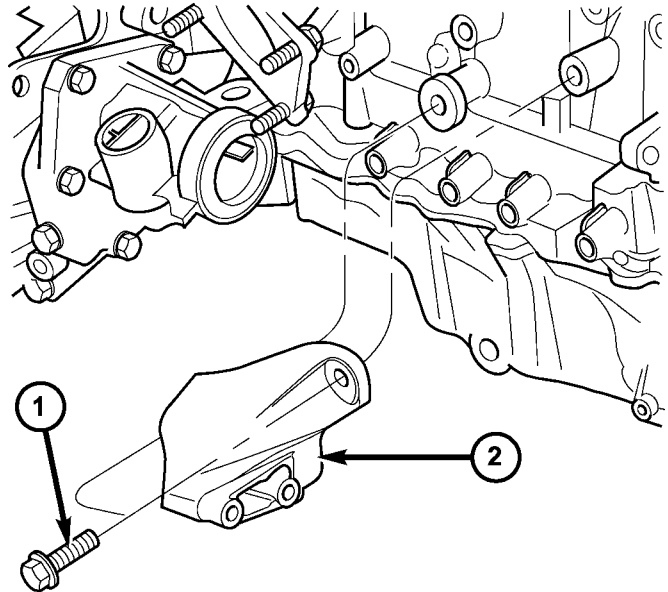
Intermediate Shaft/Bearing Assembly—2.4L Turbo Models
